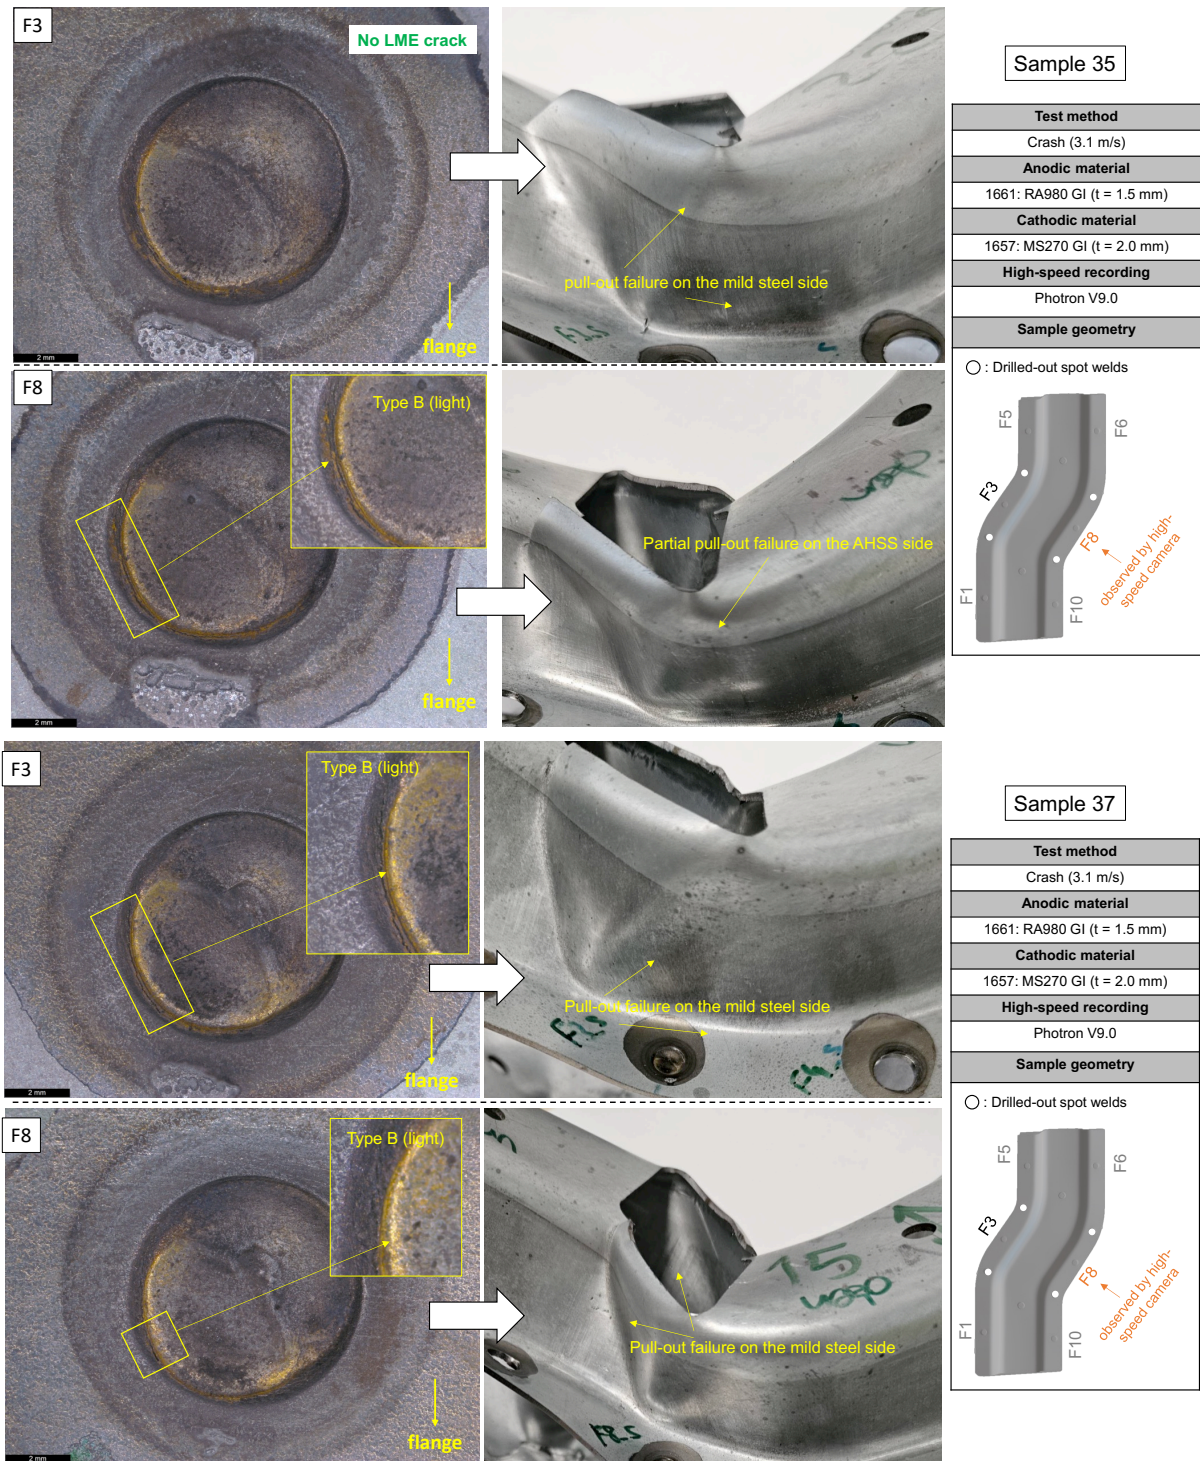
Spot weld failure in sample 35 and 37 (MTC1)
